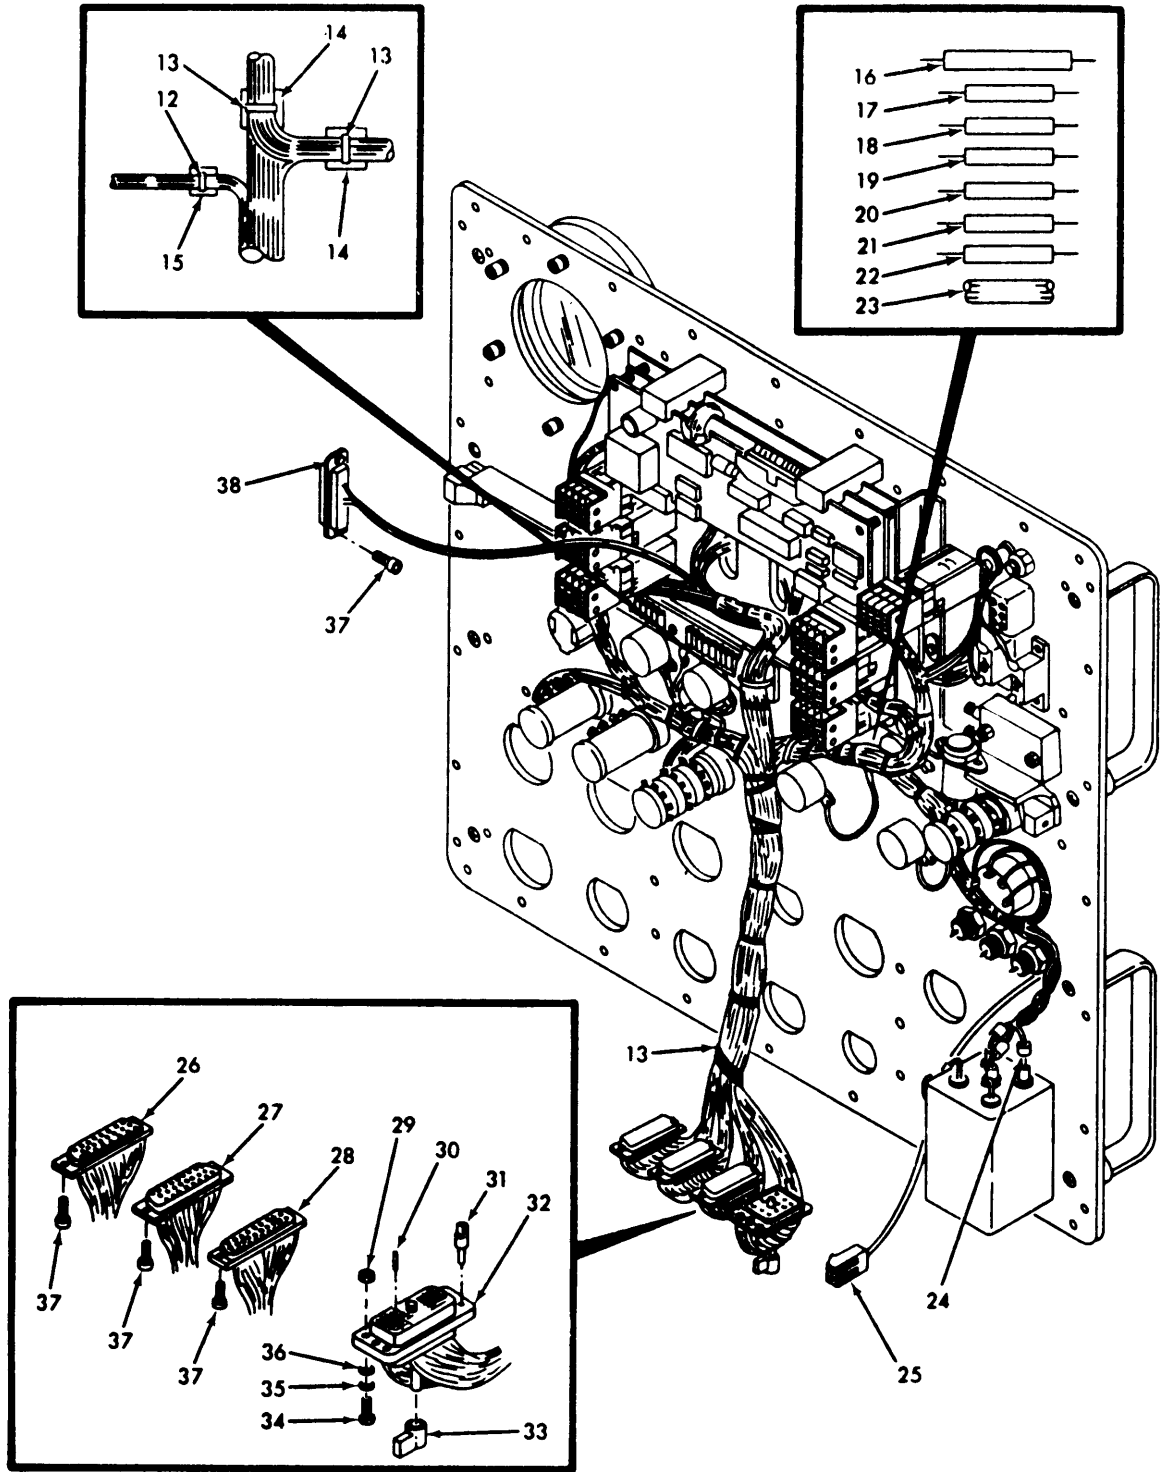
PANEL ASSEMBLY A1 COMPONENT PARTS
